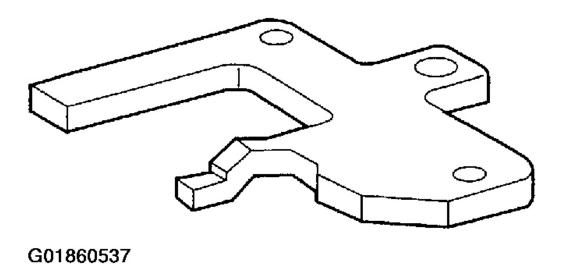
Identifying Valve Spring Compressor C-3422-CF Courtesy of DAIMLERCHRYSLER CORP.
